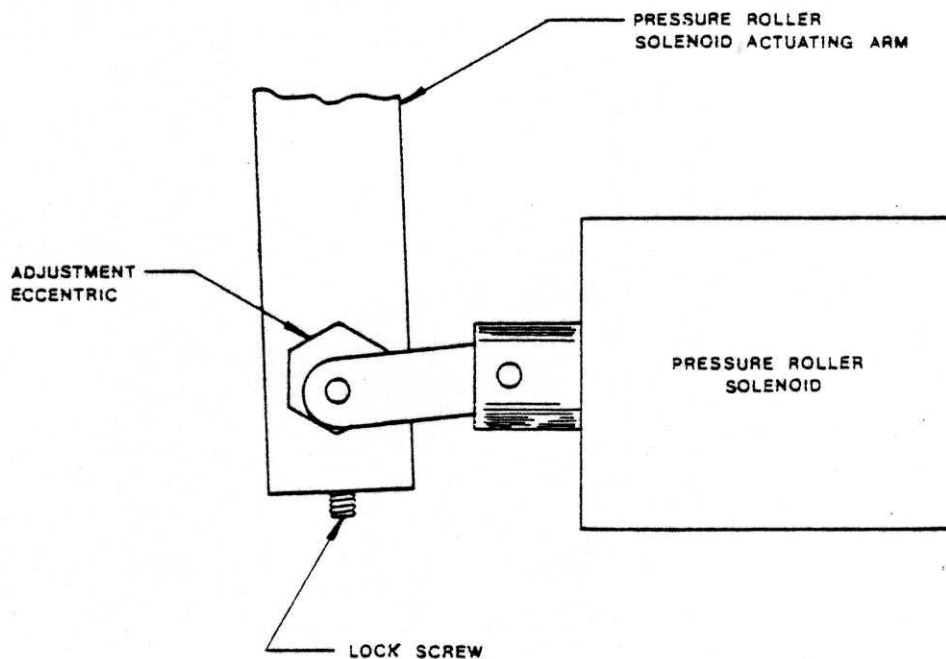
PRESSURE ROLLER SOLENOID ADJUSTMENT
